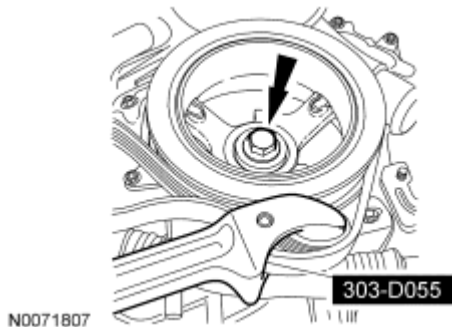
Removing Crankshaft Pulley Bolt & Washer Using Strap Wrench
